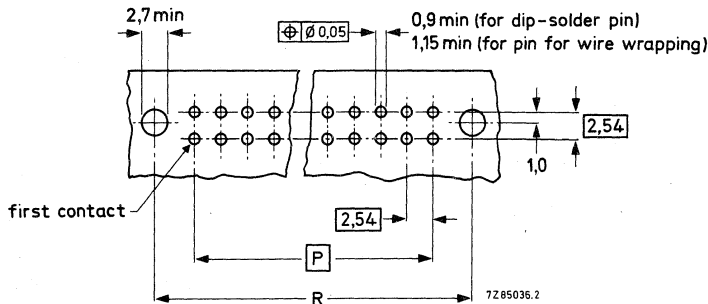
Hole pattern for male headers with 90°-angled dip-solder pins or 90°-angled pins for wire wrapping; for dimensions P and R see Table 10.
